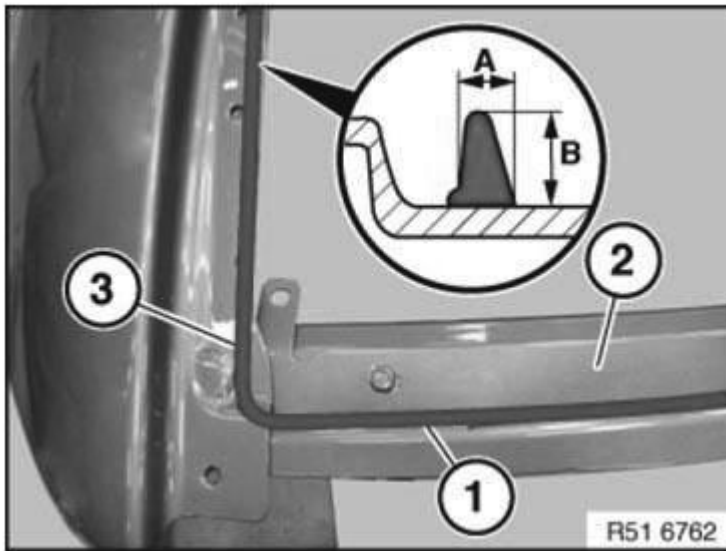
Identifying Adhesive Bead Trace (Bottom)
